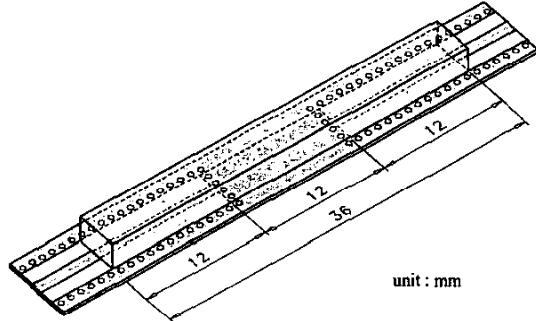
Fabricated transitions in a piece of back-to-back construction.
